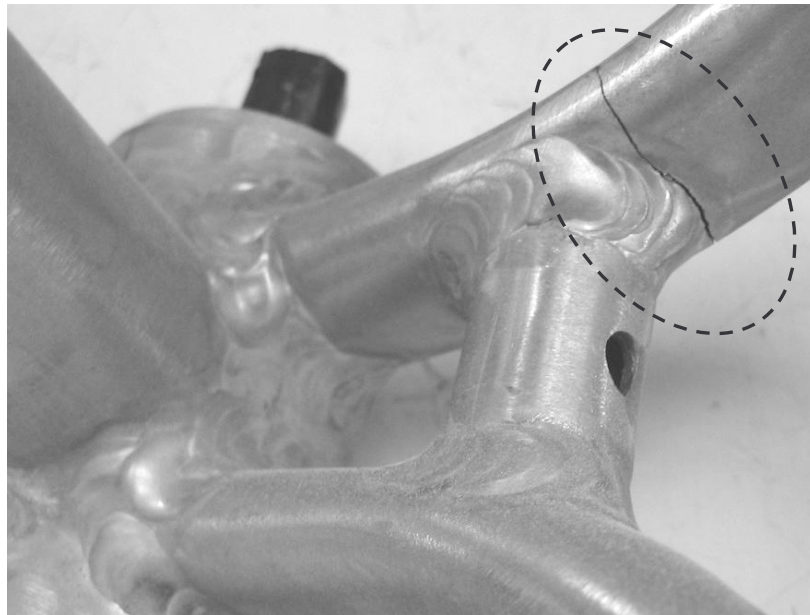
Fatigue crack location with pedalling test continued to failure
